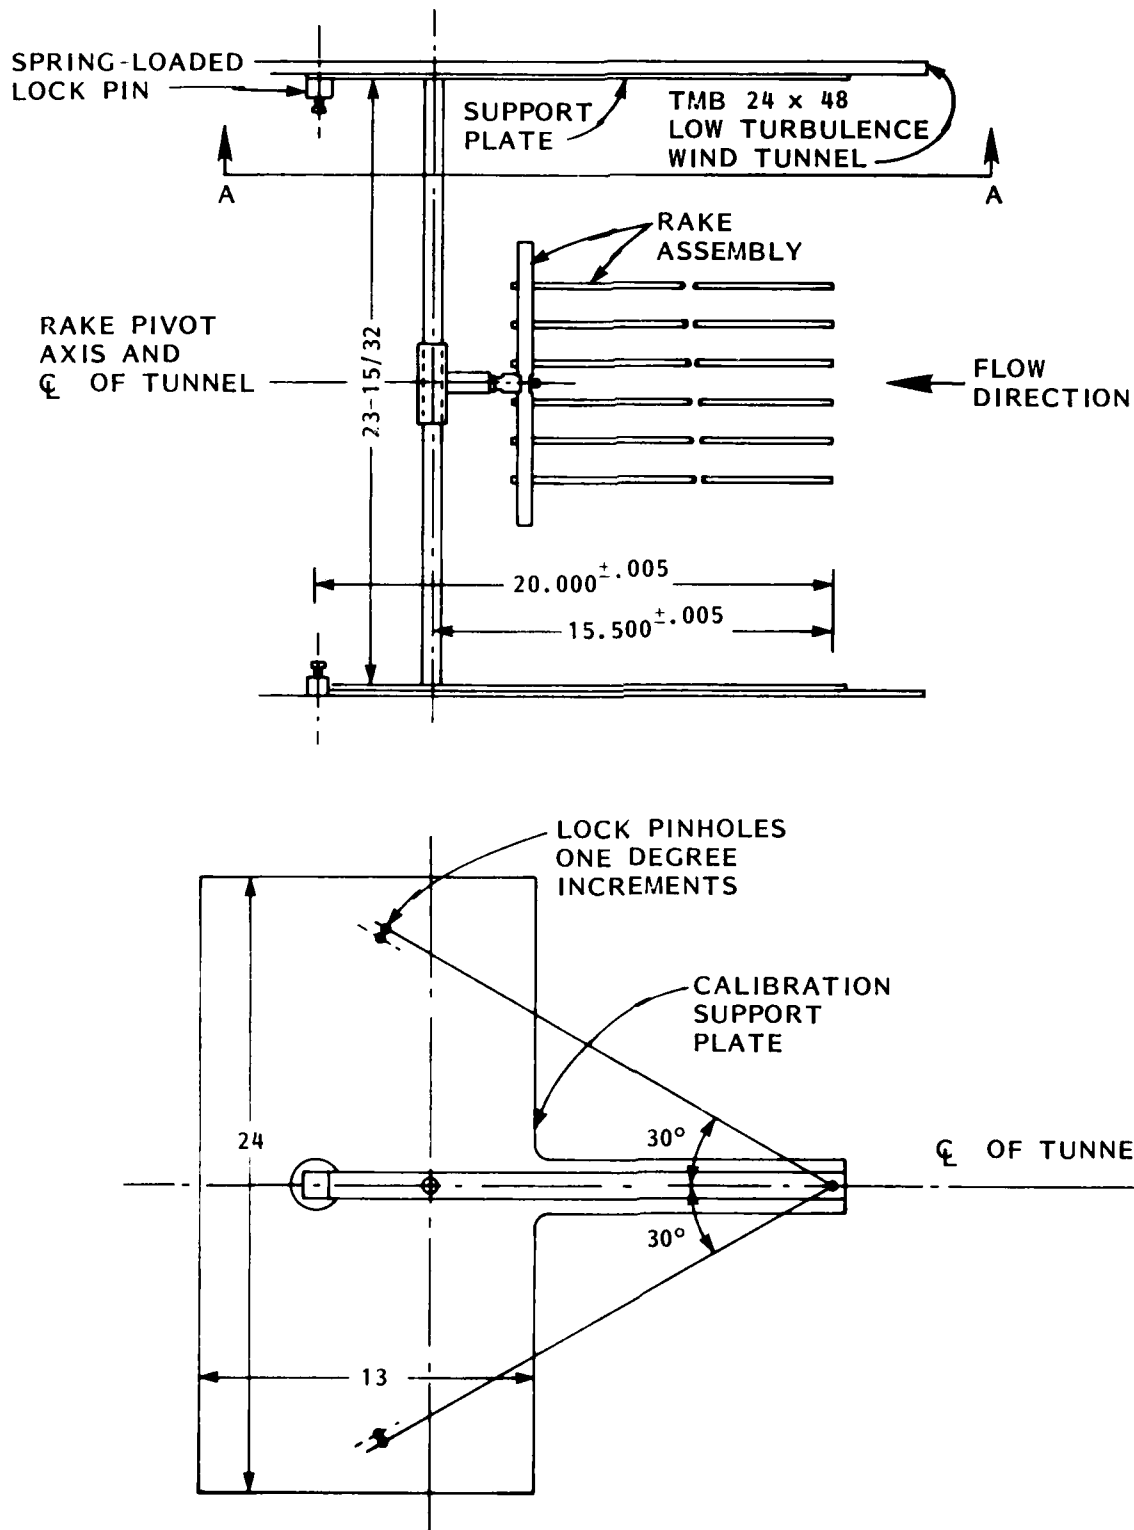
SKETCH SHOWING ARRANGEMENT FOR CALIBRATION OF PITOT-STATIC-YAWHEAD RAKE ASSEMBLY IN TMB 24 x 48 LOW-TURBULENCE WIND TUNNEL (ALL DIMENSIONS IN INCHES)
